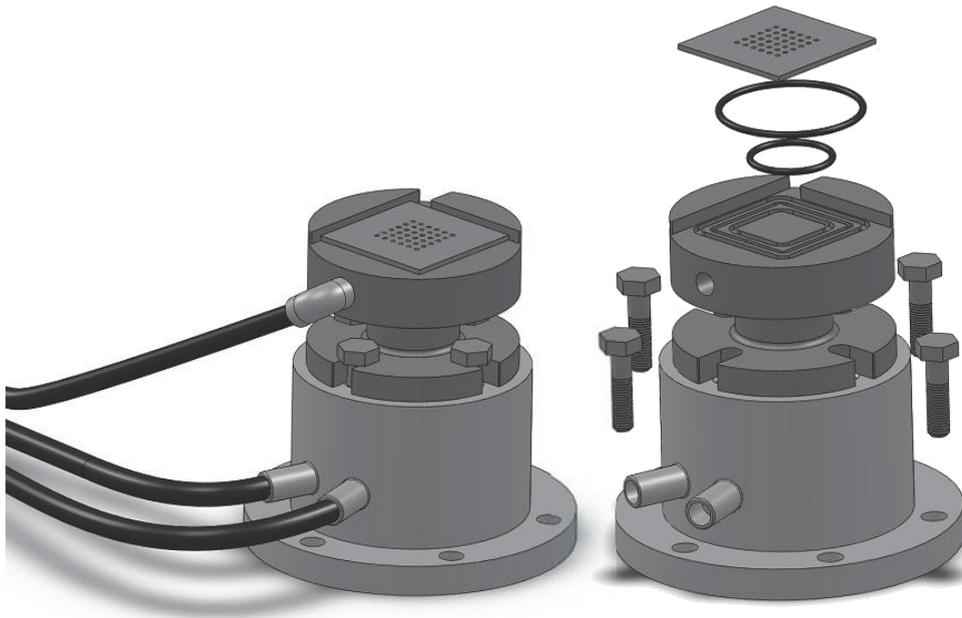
3D model of the vacuum fixture constructed placed on the dynamometer.
